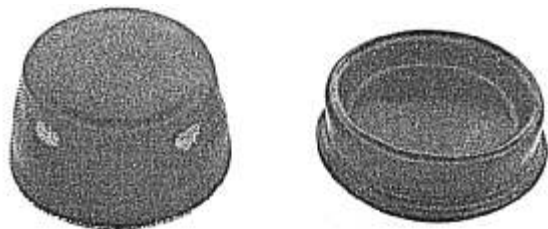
Valve diaphragm: note fatigue areas only evident when valve diaphragm is reversed.
